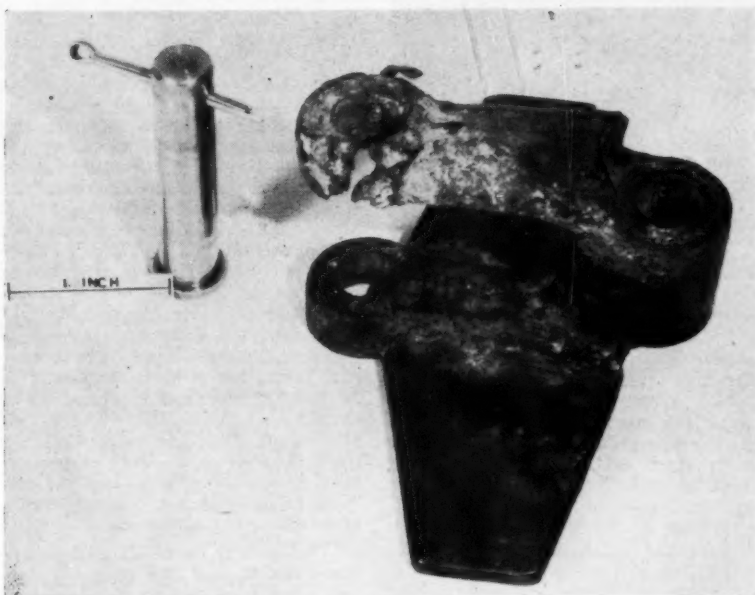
Casting showing corrosion defects, and associated link components
